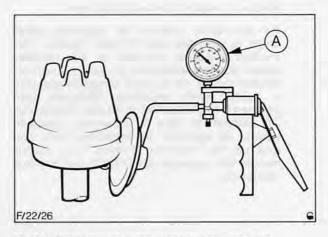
Hand vacuum pump connected to distributor A – Vacuum pump
